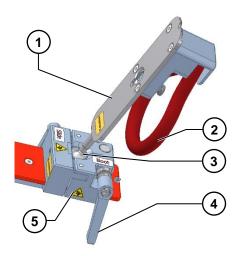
Ball-heel adapter in the ball-heel slider
